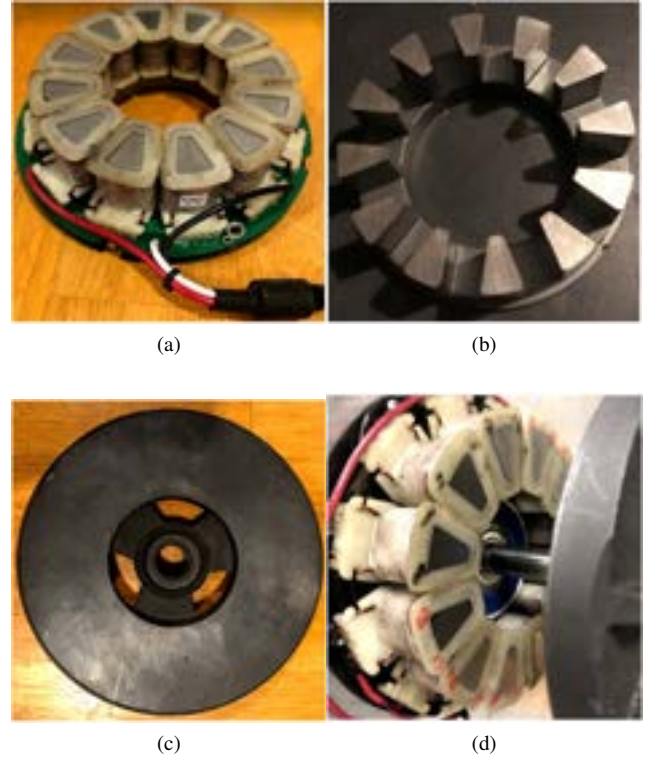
The 12s10p AFPM machine under study, (a) stator with concentrated coils, (b) stator core with full open slot, (c) rotor with bonded ring magnets, (d) stator mounted to the test fixture.
